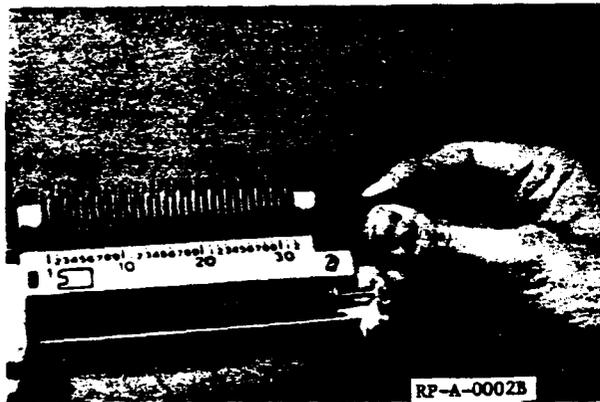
REMOVING CUTTING BLADES (PAR. 4.3.2.1, Step 1)
